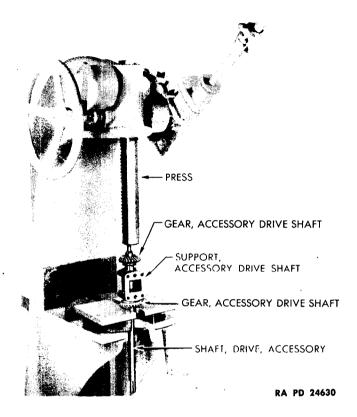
Pressing Accessory Drive Shaft Gear On Shaft
